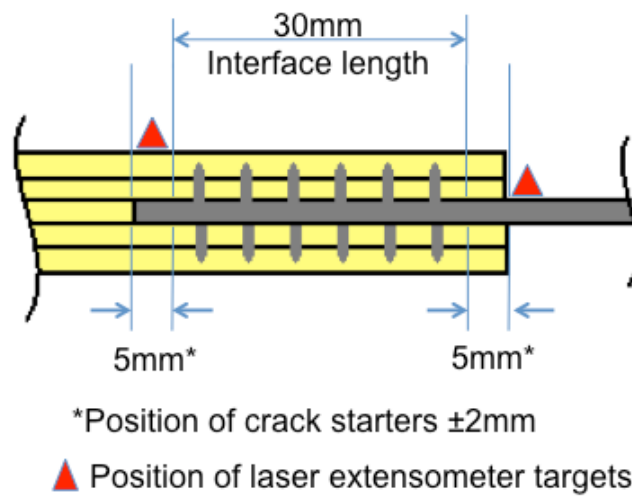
Diagram of longitudinal cross-section through tensile Double-Lap-Shear (DLS) pin-reinforced adhesive joint test specimen
